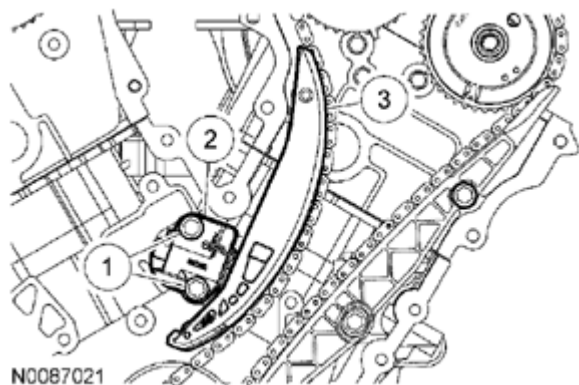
Identifying LH Timing Chain, Tensioner Arm And Bolts
